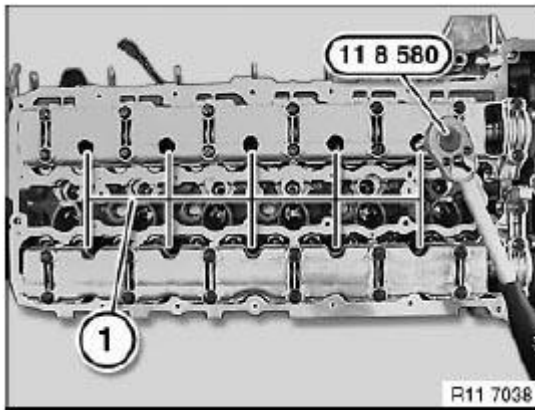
Releasing M10 Cylinder Head Bolts Using Special Tool (11 8 580)
